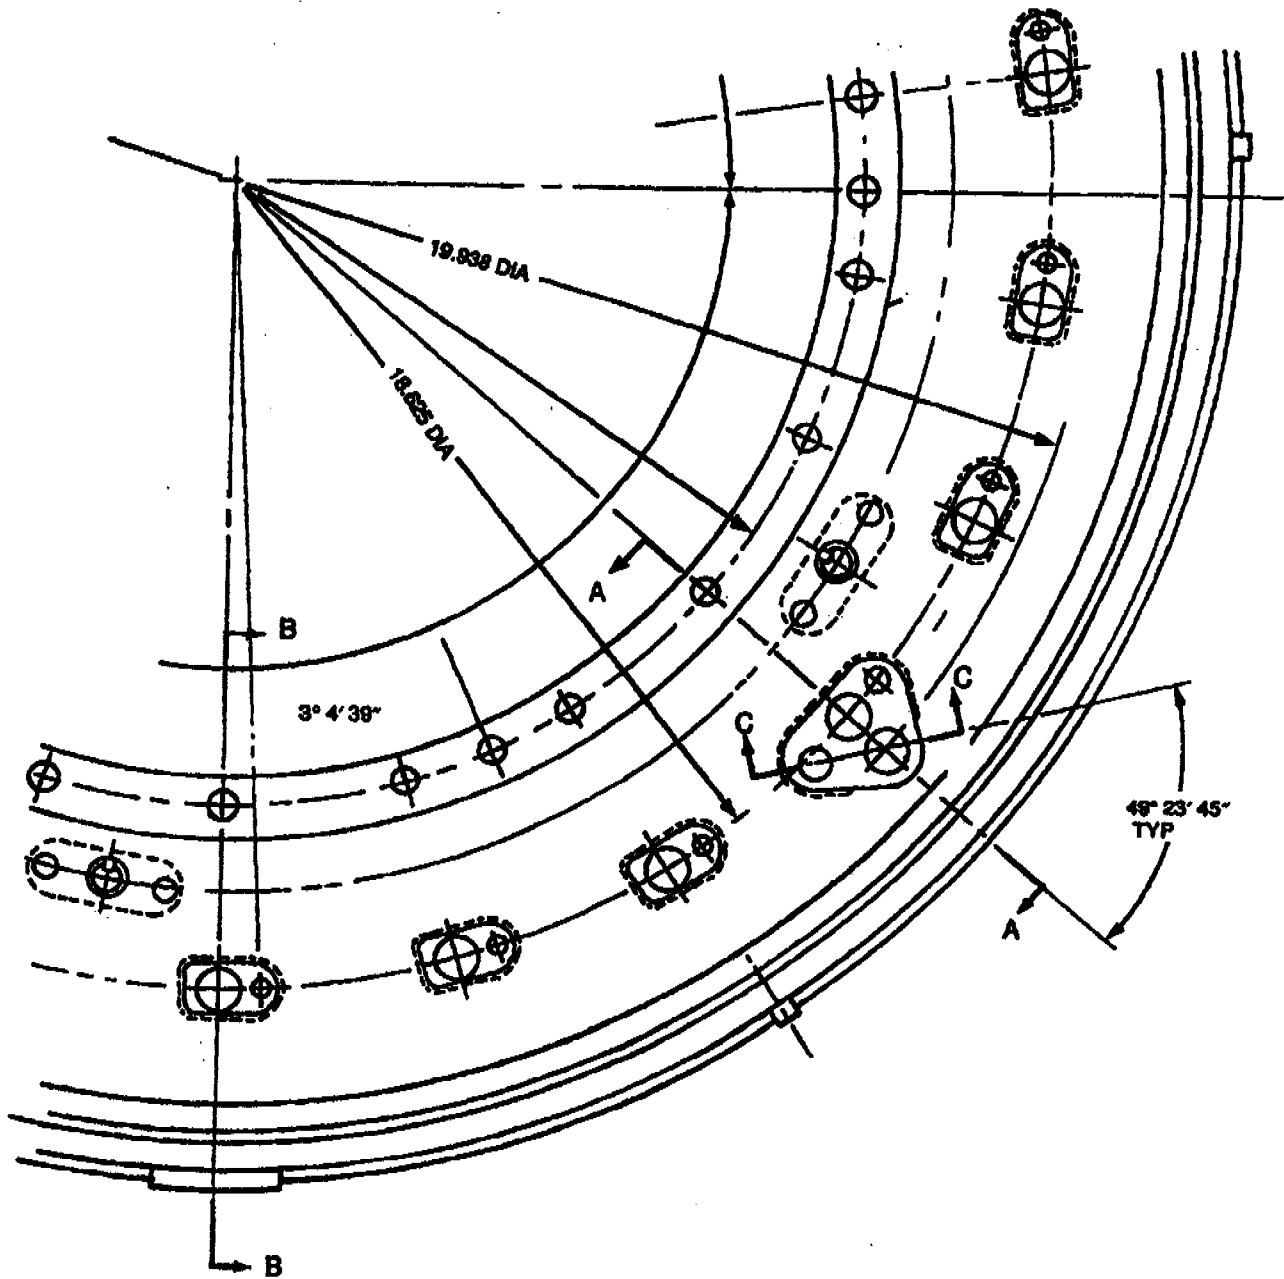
Ignitor and Fuel Adapters, Combustor Housing (Sheet 1 of 2).
